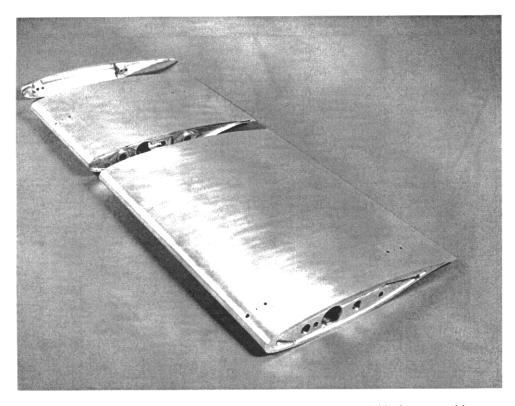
Photograph of Benchmark Supercritical Wing Model before assembly.
